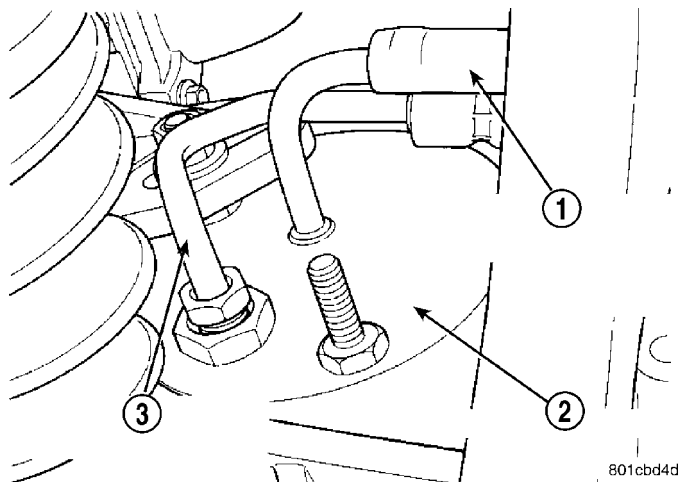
Pressure Hose Connection To Power Steering Pump - 2.4L Engine
